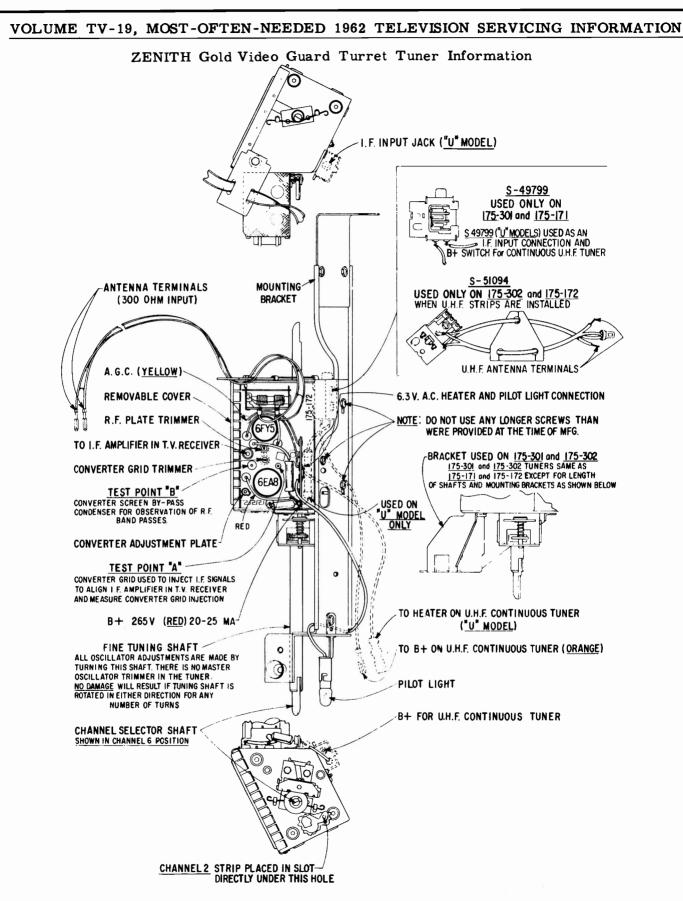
Tube and Trimmer Layout, Gold Video Guard Turret Tuner
